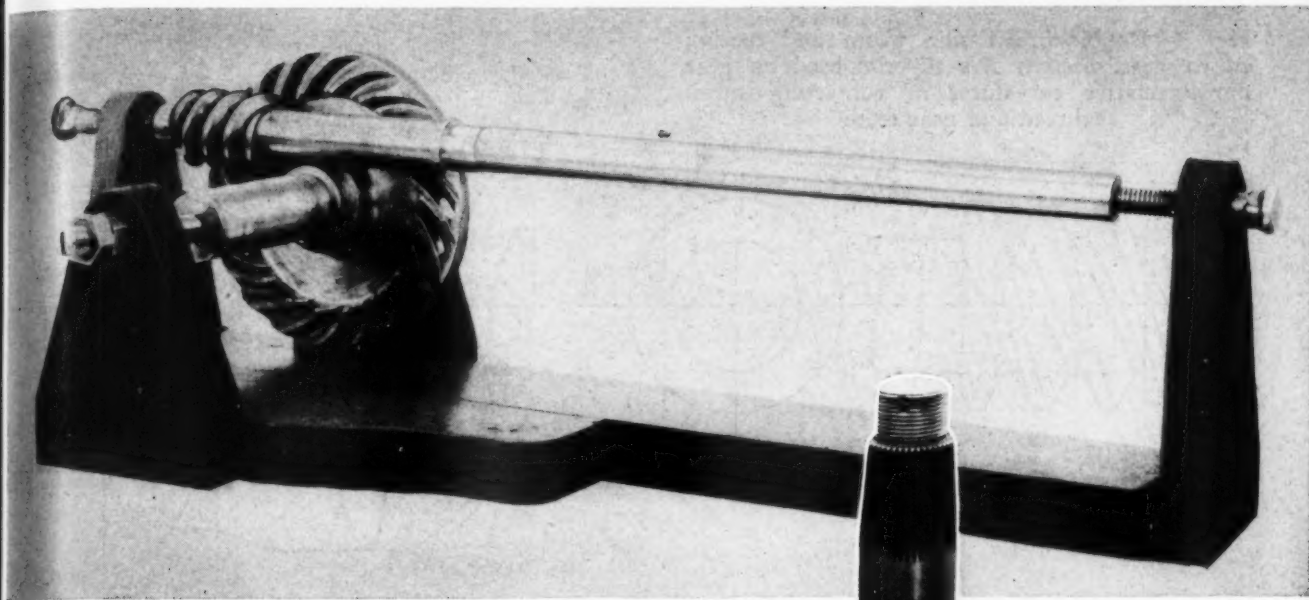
Above — Working model of side-worm gearing, showing how close proximity of worm and gear axes permits compact design
